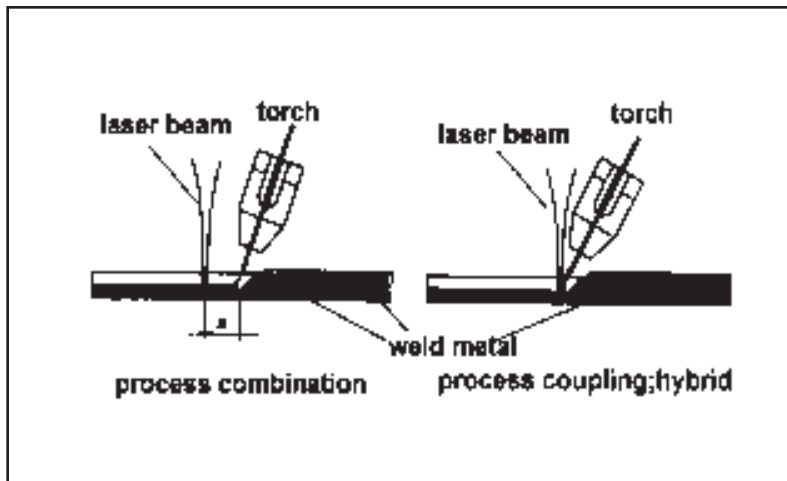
Process combination (they are separated by distance  $a$ ) and process coupling in hybrid welding (Ref. 3).
